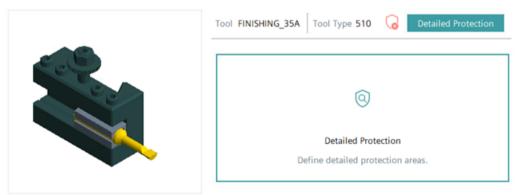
Detailed protection: Example of an end mill with imported geometries of the tool holder and the tool
